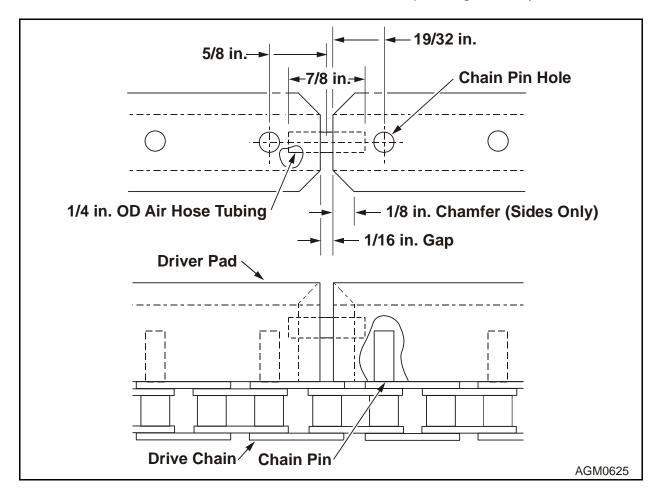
10 Cutting and Re-Splicing the Driver Pad
